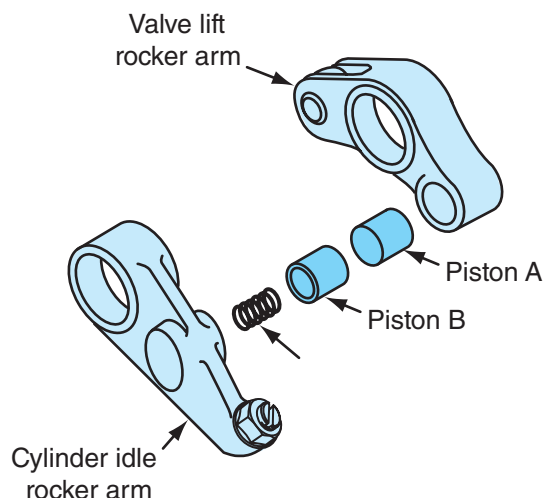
A rocker arm assembly for the cylinder idling feature.
